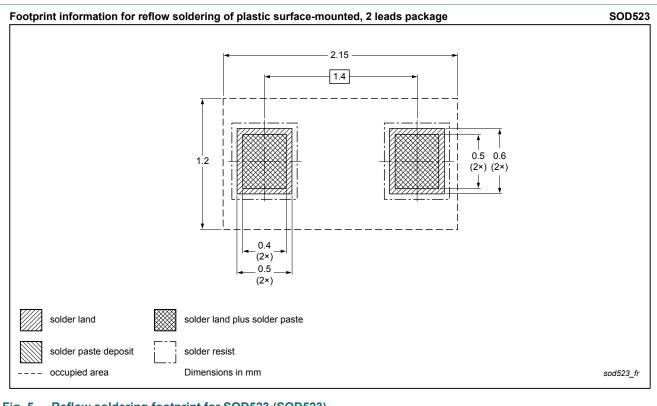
Reflow soldering footprint for SOD523 (SOD523)
